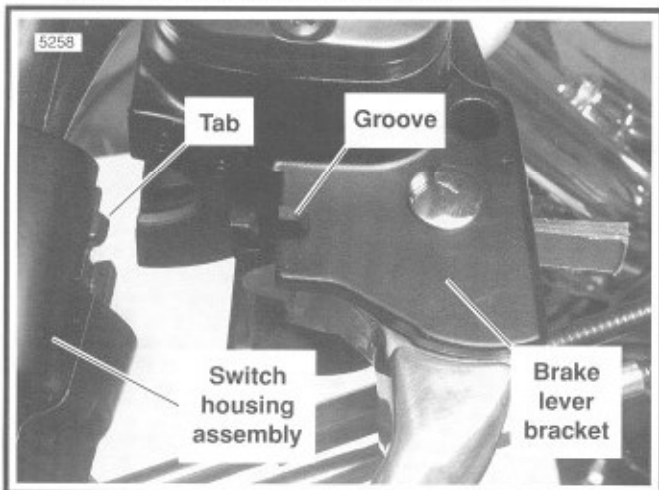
Fit Brake Lever/Master Cylinder to Right Handlebar Switch Housings
